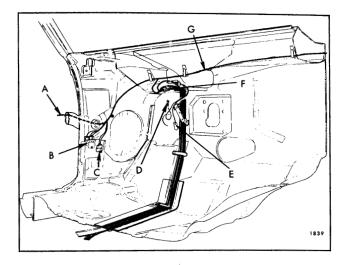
Front End Power Window Wiring -Oldsmobile "B-C & E"
